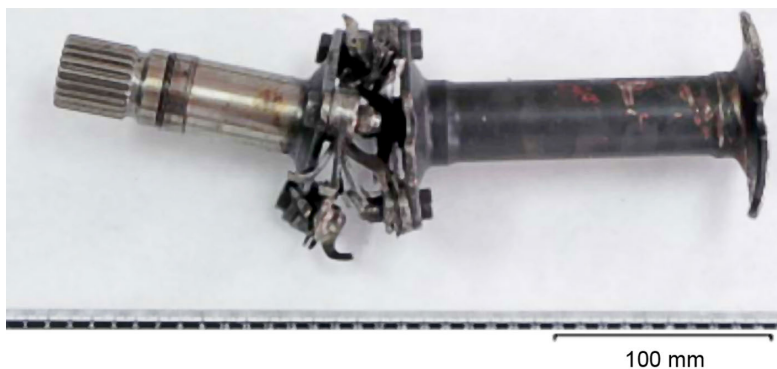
Intermediate shaft coupled to the shaft that enters the combined gearbox via its partially broken flexible coupling
